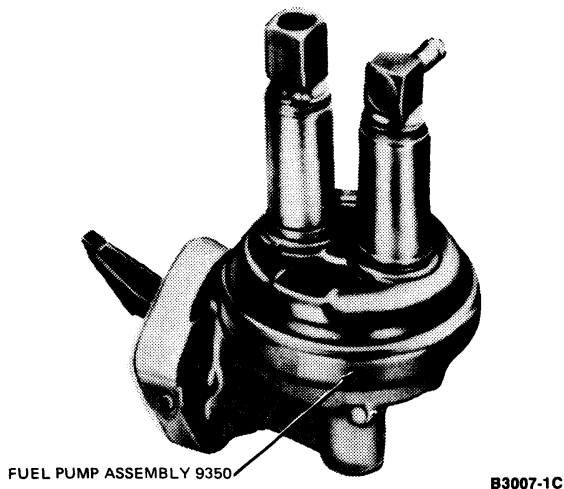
Carter Permanently-Sealed Fuel Pump for Six Cylinder Engines
